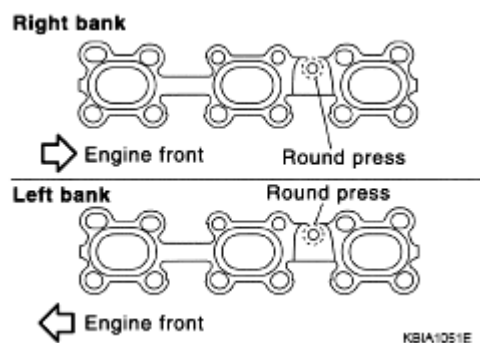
Identifying Exhaust Manifold Gasket Install Direction
